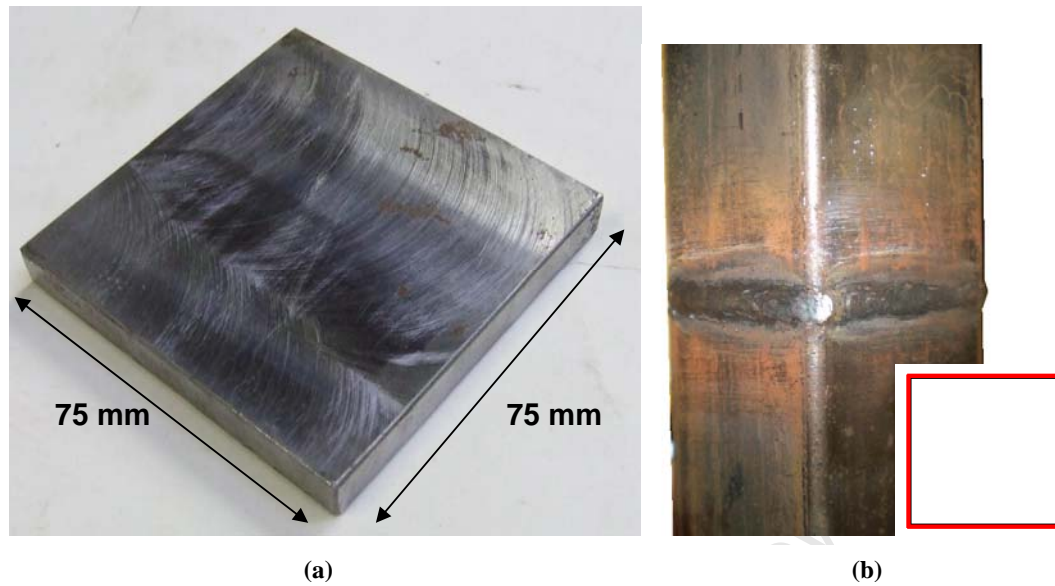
(a) Rigid mild steel plate inserted between tubes in 'p' configuration and (b) two mild steel tubes TIG welded together (with top view shown) as in 'w' configuration.
